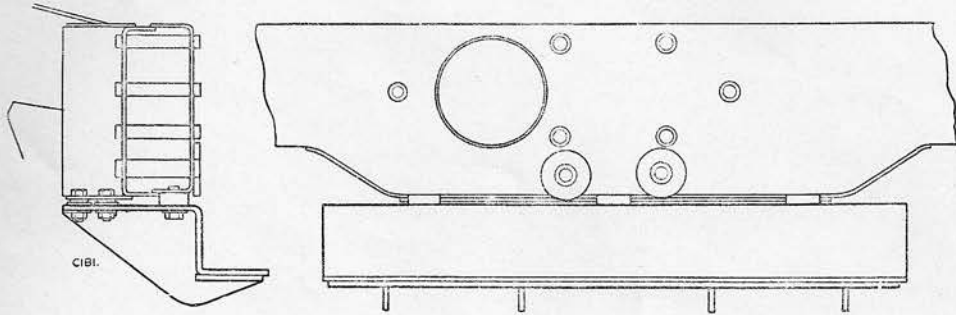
Rear towing plate Part No. 501683 fitted to chassis frame.
